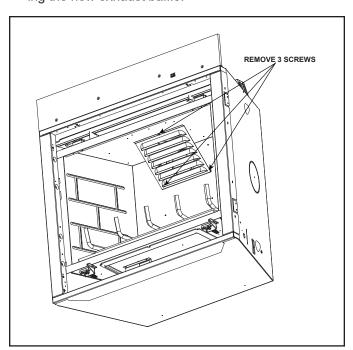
Remove Exhaust Baffle (6000C ONLY)
